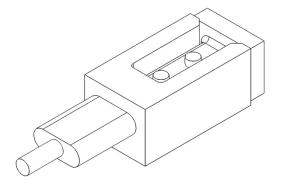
Wrenching Strength Test with Cable in Fixture
